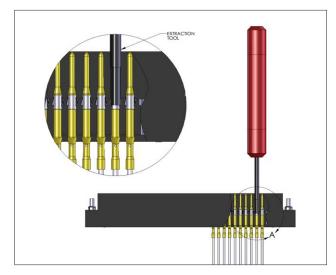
Figure B. Ensure that the tool is kept perpendicular to the module face to avoid damage to either the contact or tool.
